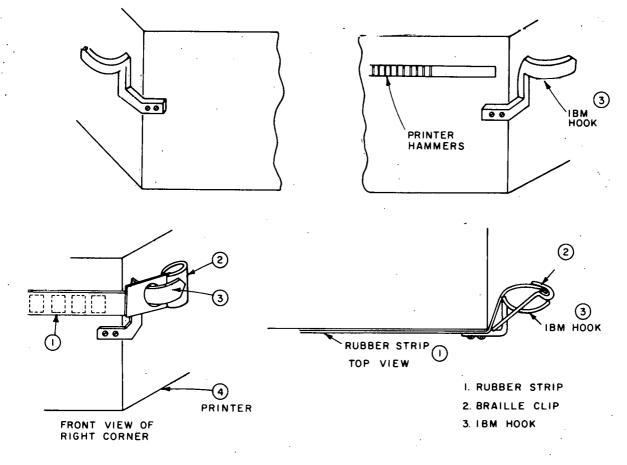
Method of Attaching Cushioning Strip to IBM Braille Hooks
